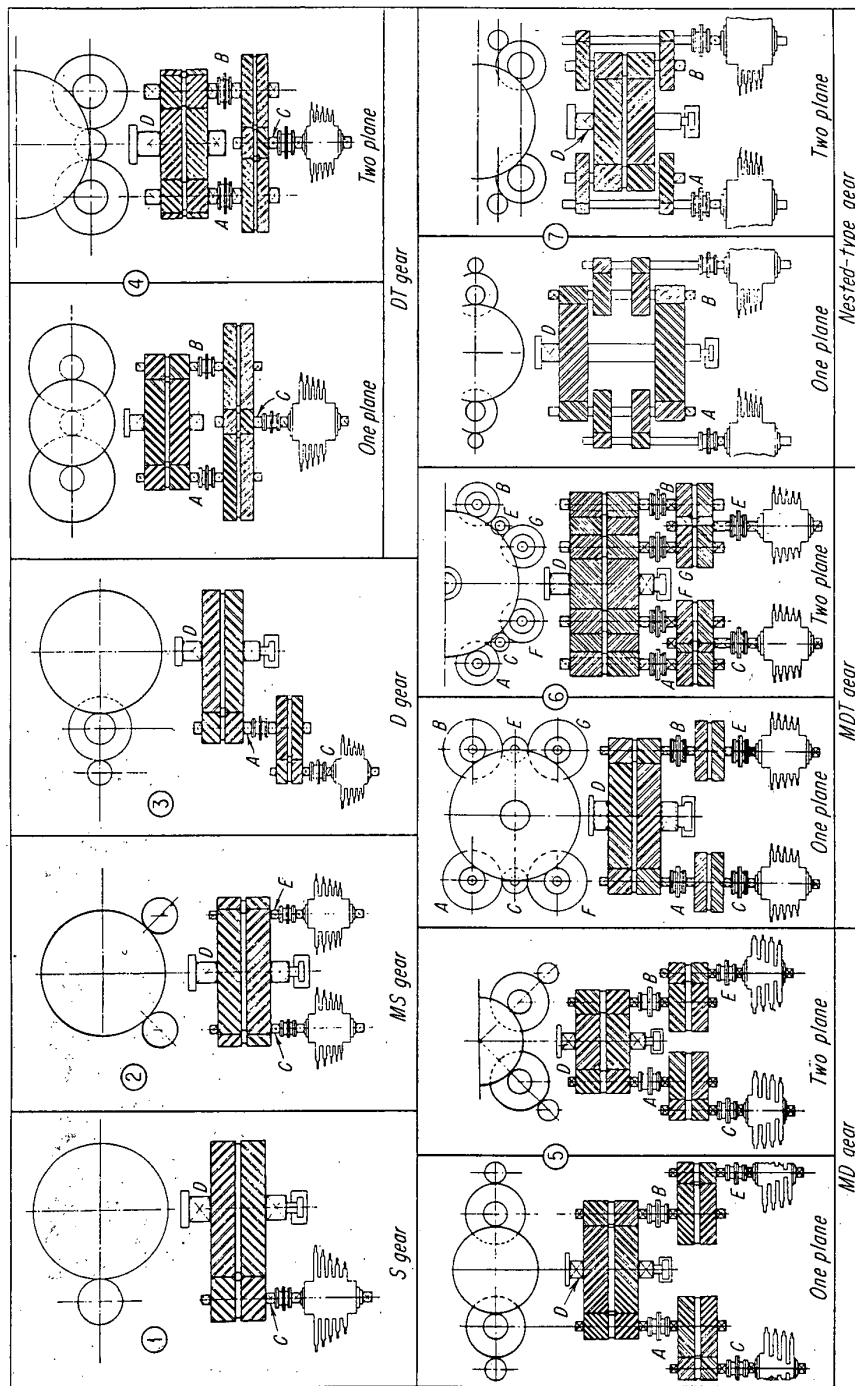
Some schematic arrangements for parallel-axis gears.
